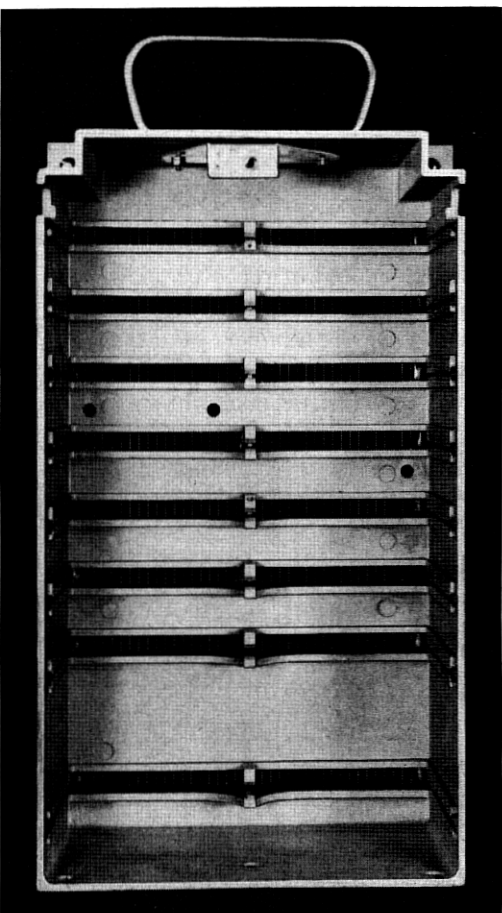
Prototype model of connector box unequipped showing grid wires.
